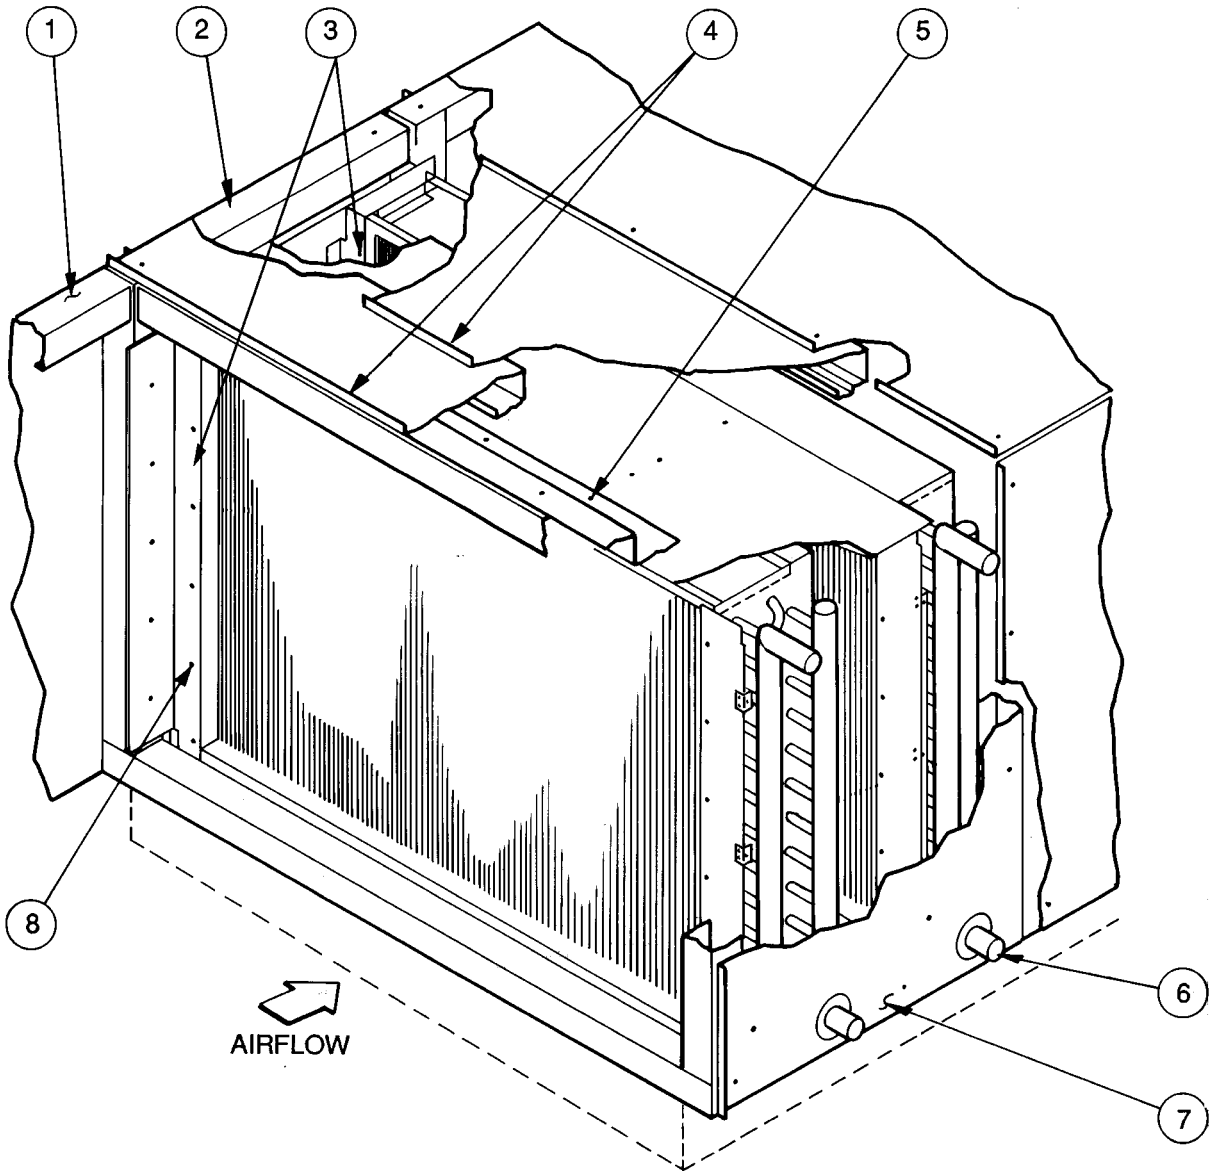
Horizontal or Vertical Unit — Dual Coil Removal (39LA,LD Units, Size 25)
